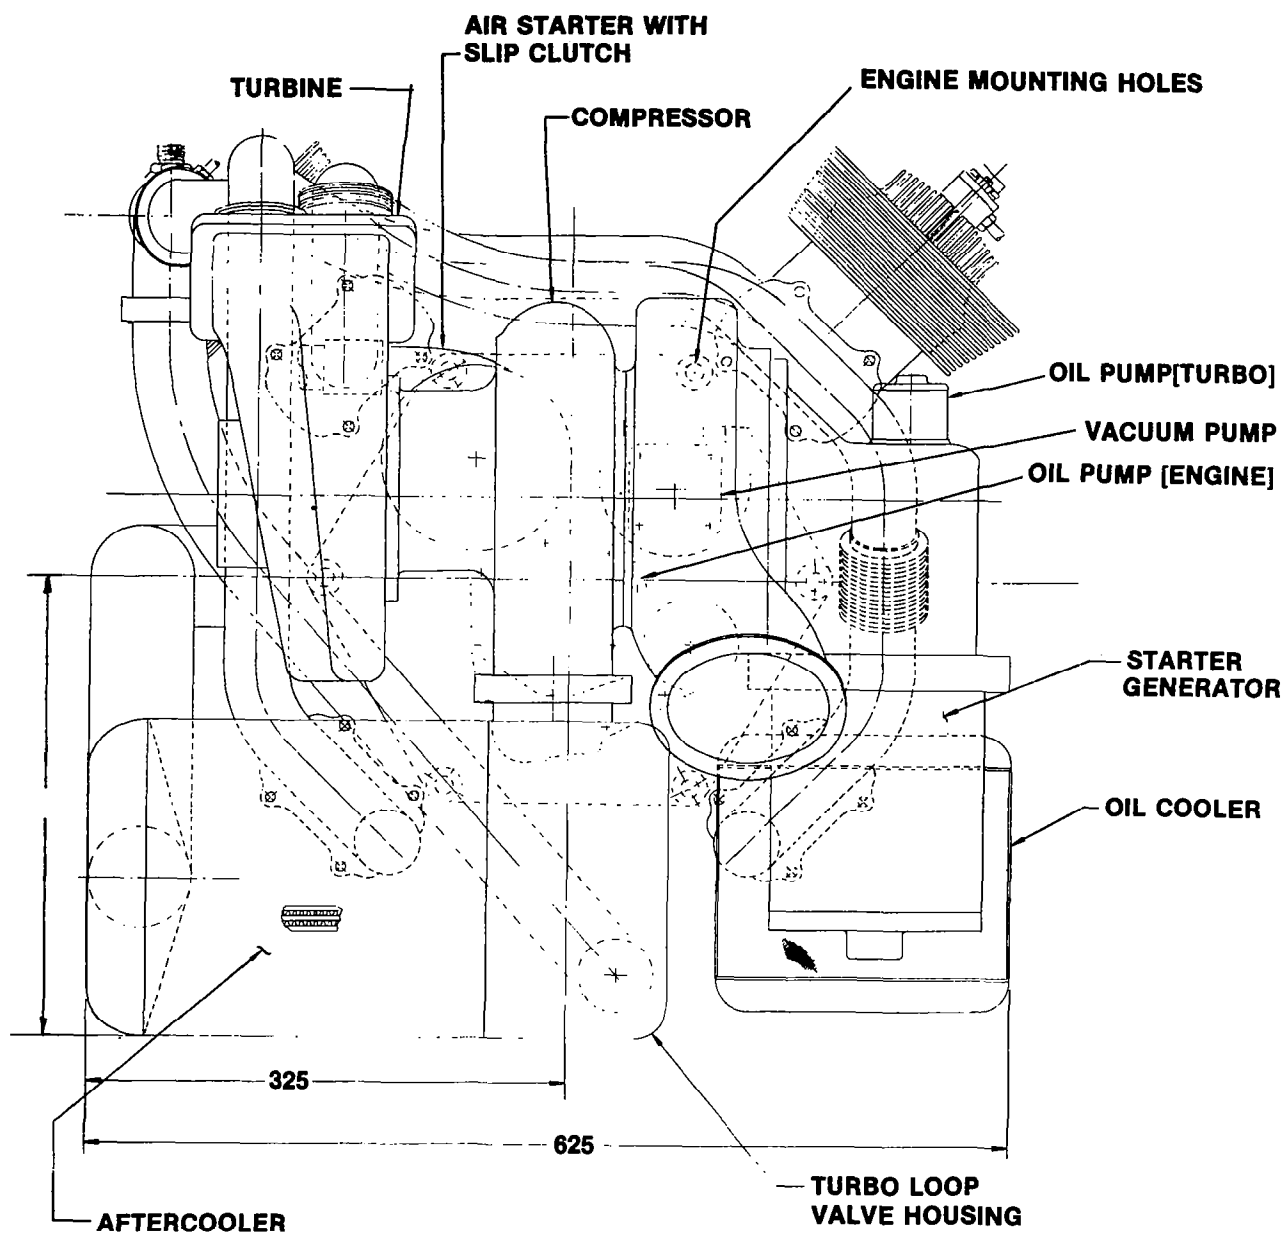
186kW AIRCRAFT DIESEL REAR VIEW
